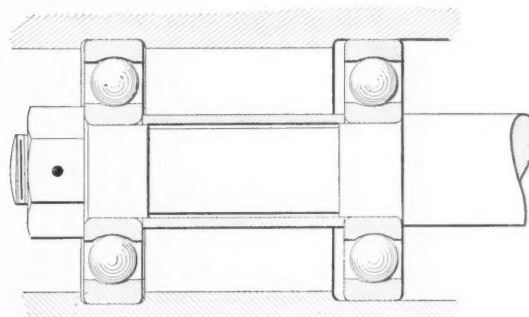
Radial Bearings Arranged to take Axial Thrust
